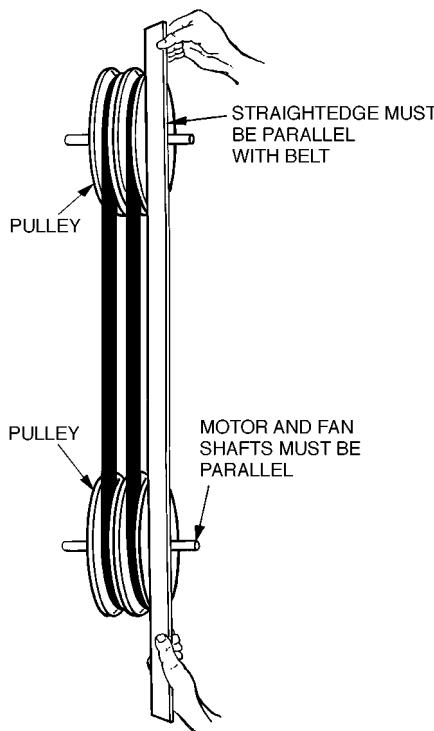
Evaporator-Fan Pulley Alignment and Adjustment
